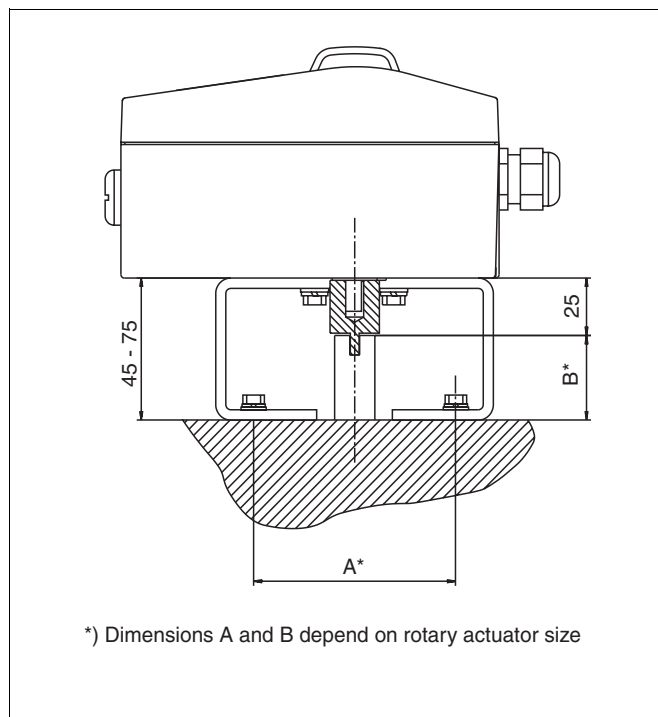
Mounting to rotary actuators to VDI/VDE 3845
